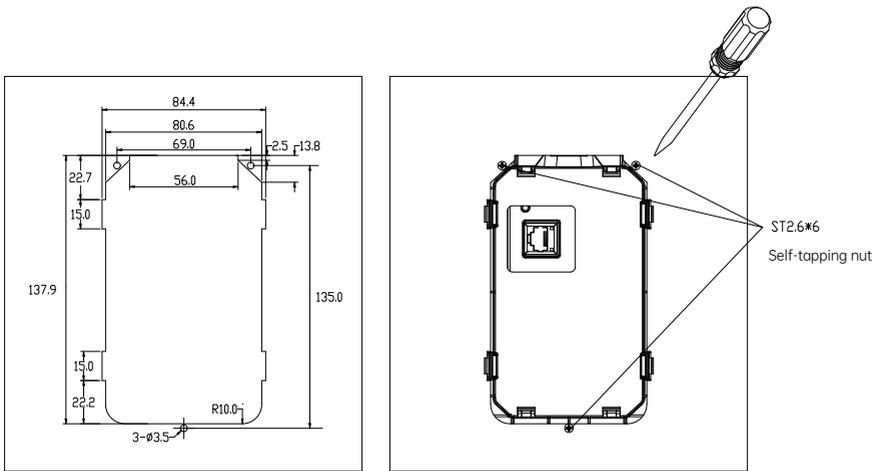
Mounting hole dimensions for large operating panel fixed base (unit: mm)
